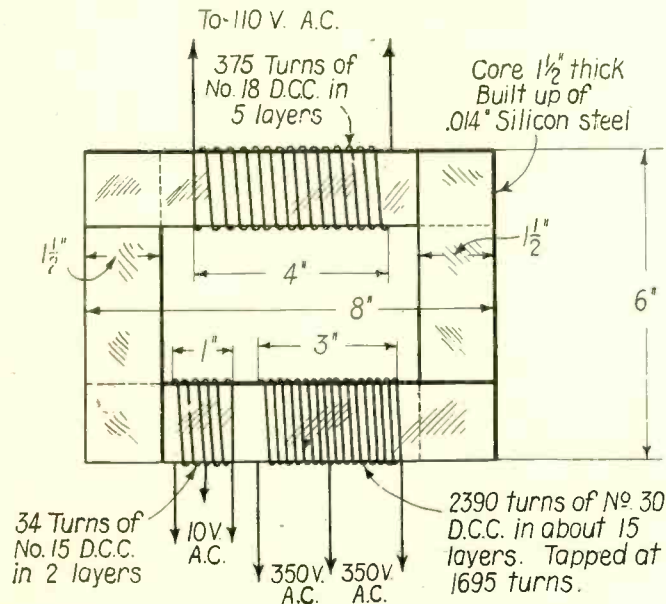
Diagram showing location and winding of coils on the transformer. The manner of constructing the core is also shown.
